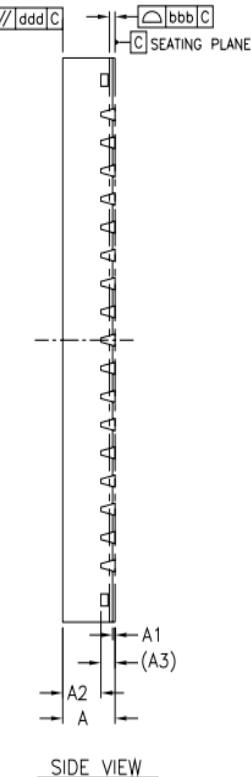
RKNanoD-N QFN68 Package Side View
